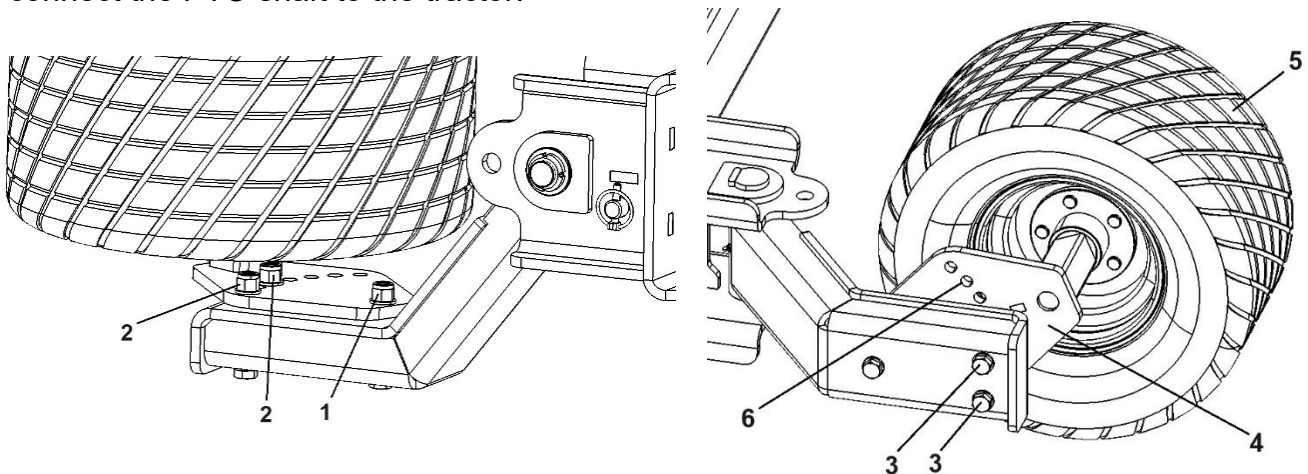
Adjusting the position of the support wheels: 1 – nut, 2 – nut, 3 – bolt, 4 – adjustment plate, 5 – support wheel, 6 – adjustment holes
